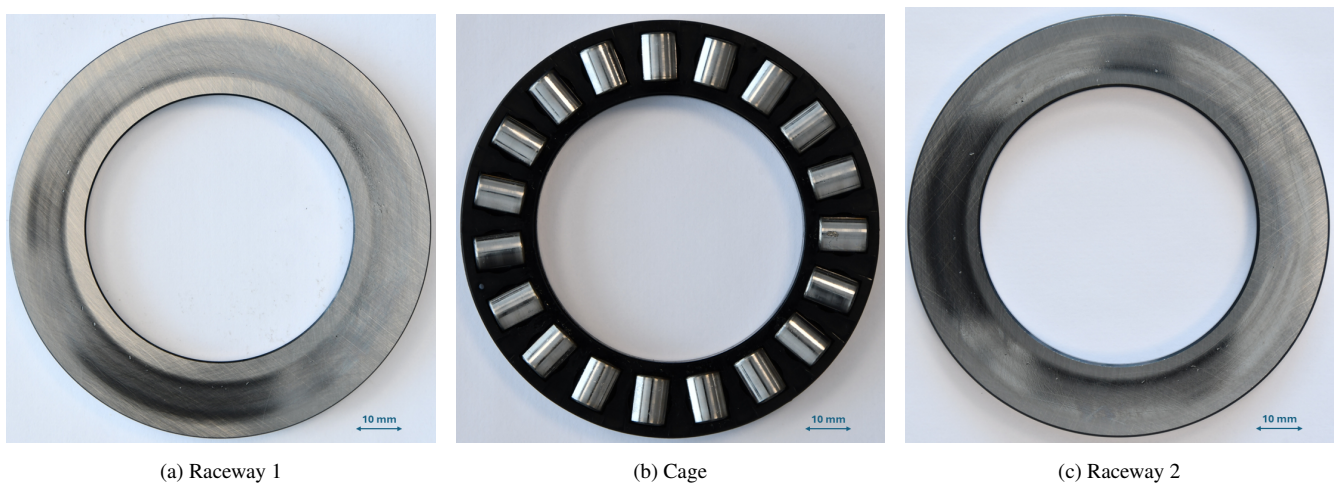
Pictures of bearing components for Bearing 2 of T03. Refer to Table 5 for designation of tests. The outer diameter of the bearing is 95 mm and the diameter and length of the rollers are both 11 mm.
